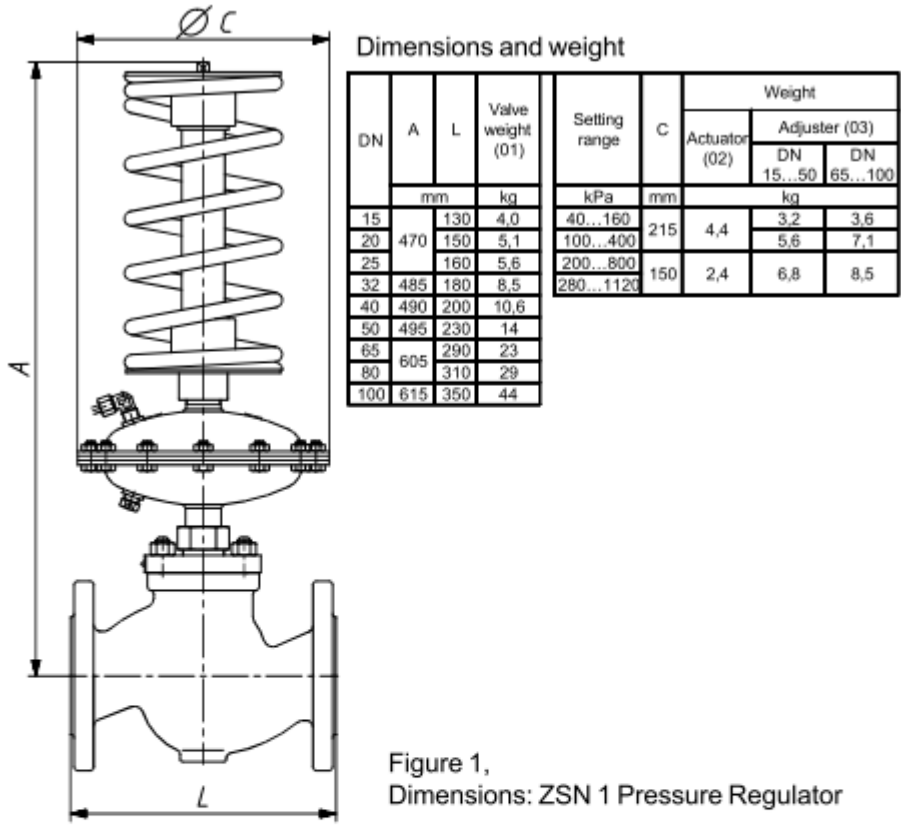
, Dimensions: ZSN 1 Pressure Regulator
